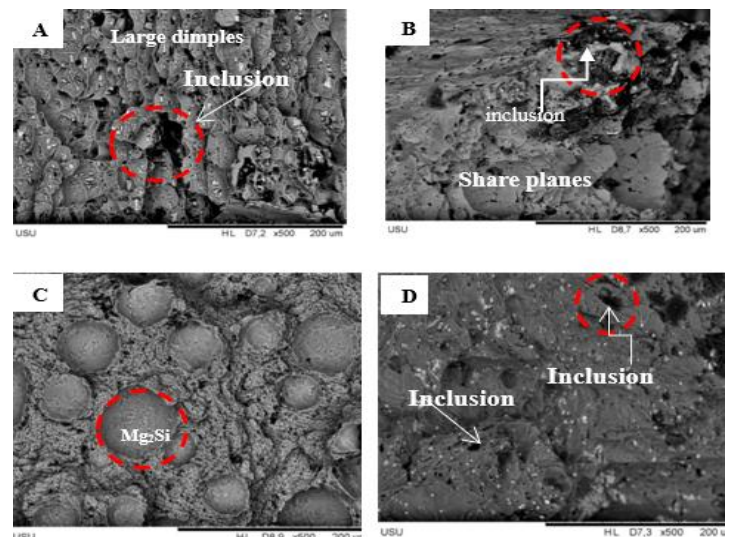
SEM images of fracture surface impact specimen a) Al6061-T6 (b) GTAW ER4043, (c) GTAW ER5356, (d) GTAW ER4047
